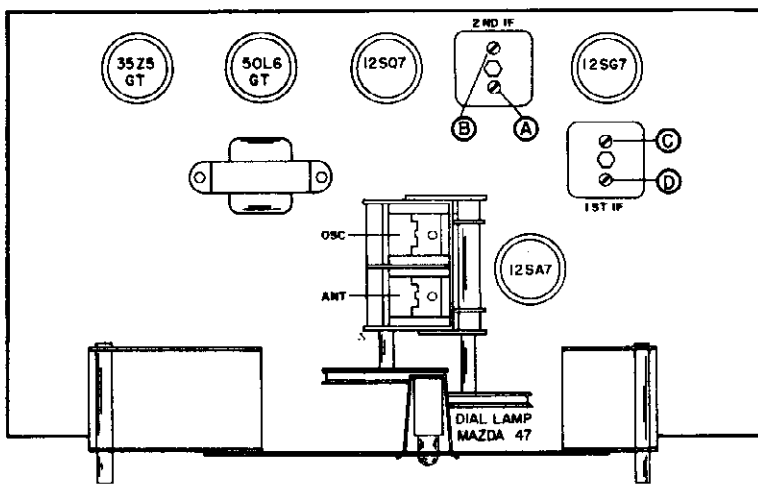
Top View of Chassis Showing Location of Alignment Adjustments, Tubes and Dial Lamp
